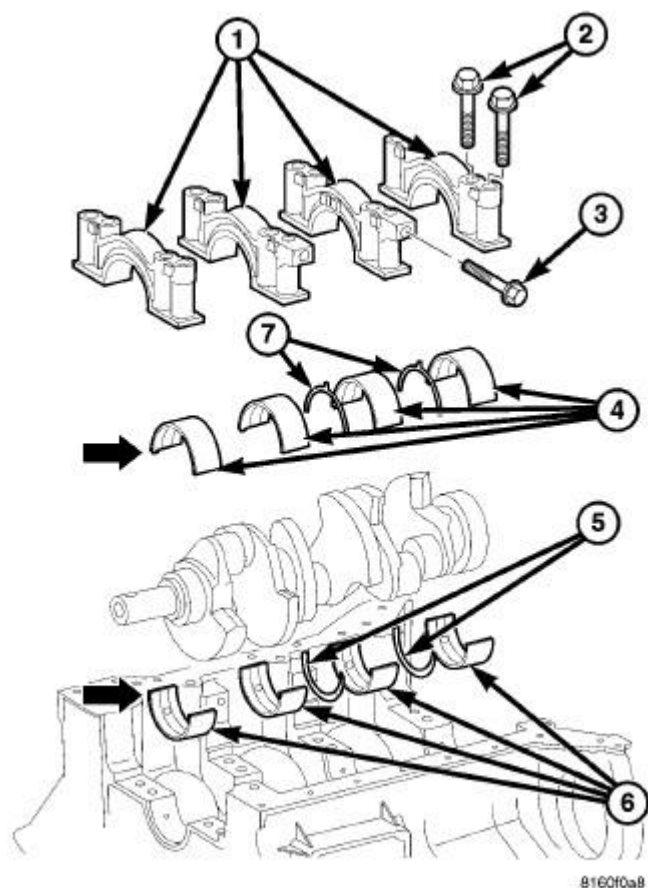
CRANKSHAFT MAIN BEARINGS AND CAPS
